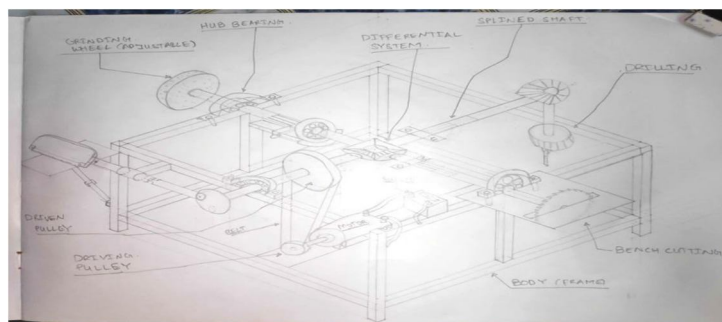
Design and Fabrication of Multipurpose Mechanical Machine
